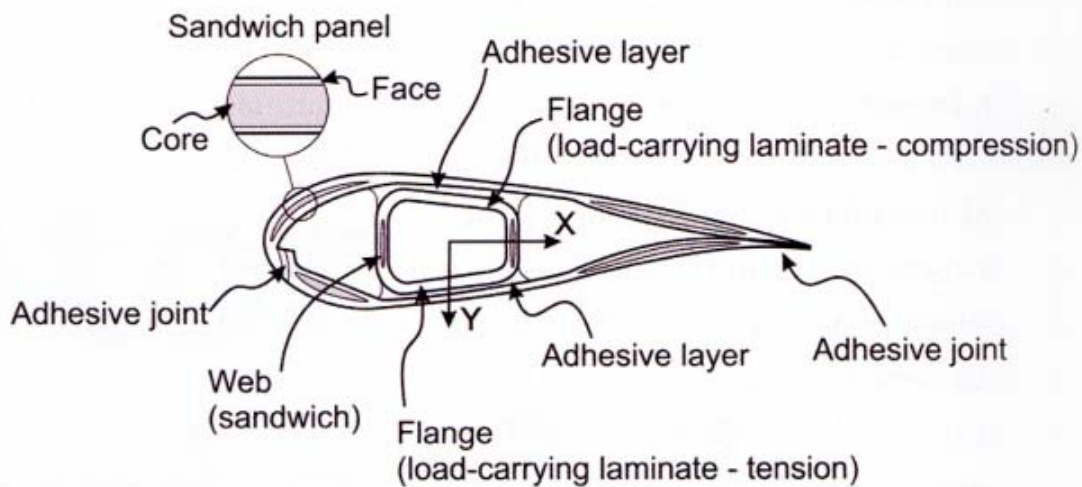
Typical cross sections of wind turbine blade with girder box showing laminate, sandwich and adhesive bonds. Reference [4].
